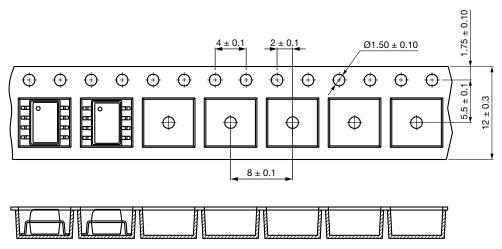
Tape and Reel Packaging (2000 pieces on reel)
